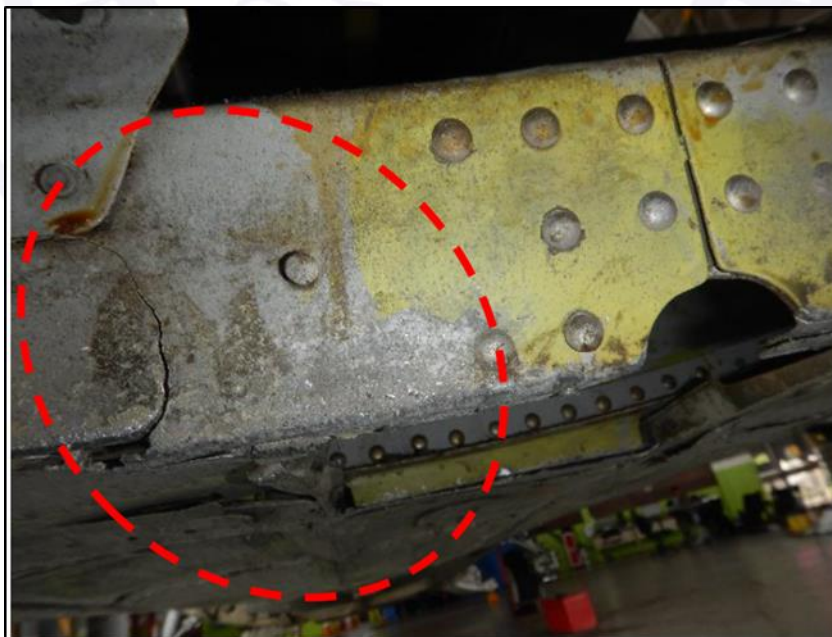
Lower segment of frame 12, showing corrosion and fracture.
